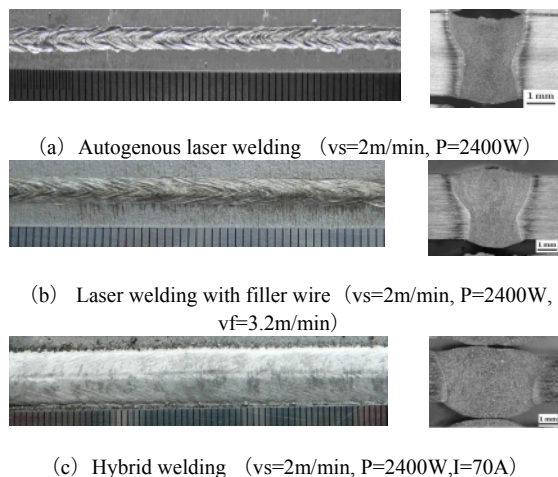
Characteristics of weld joints using different welding ways
